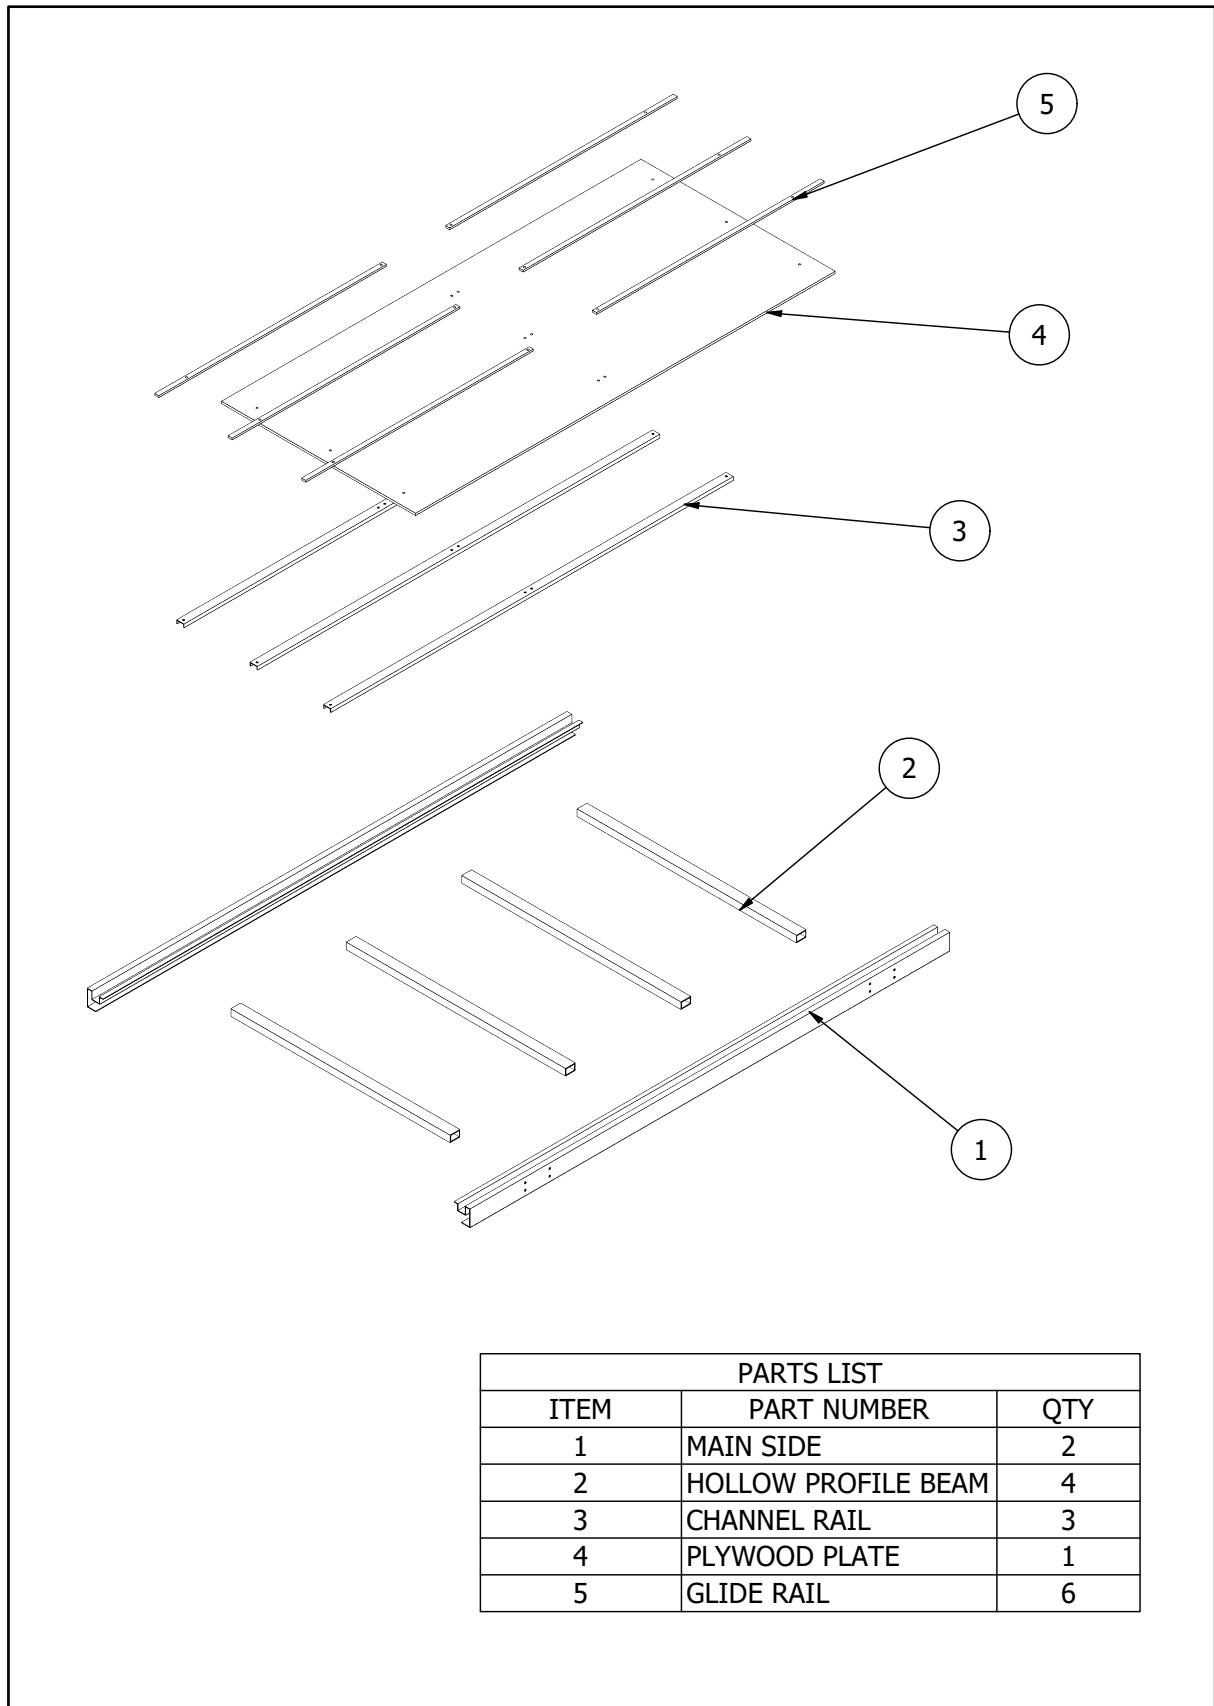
Exploded view with parts list for optimized frame. Produced in [15].
